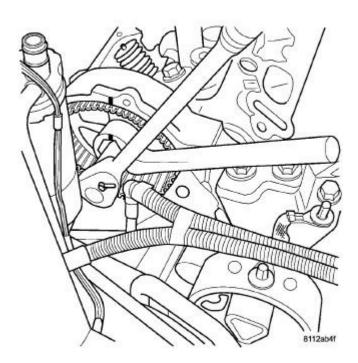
RIGHT CAMSHAFT SPROCKET Courtesy of CHRYSLER LLC
